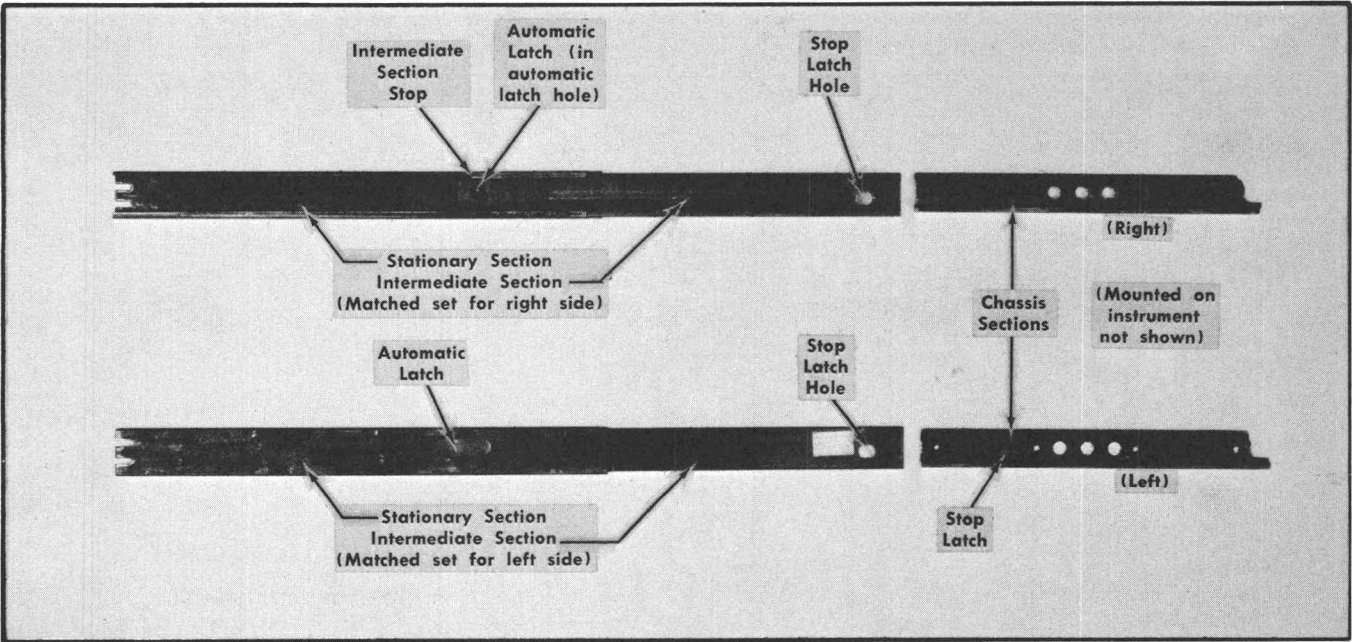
Illustration showing the 1 3/4-inch wide slide-out track assemblies.
